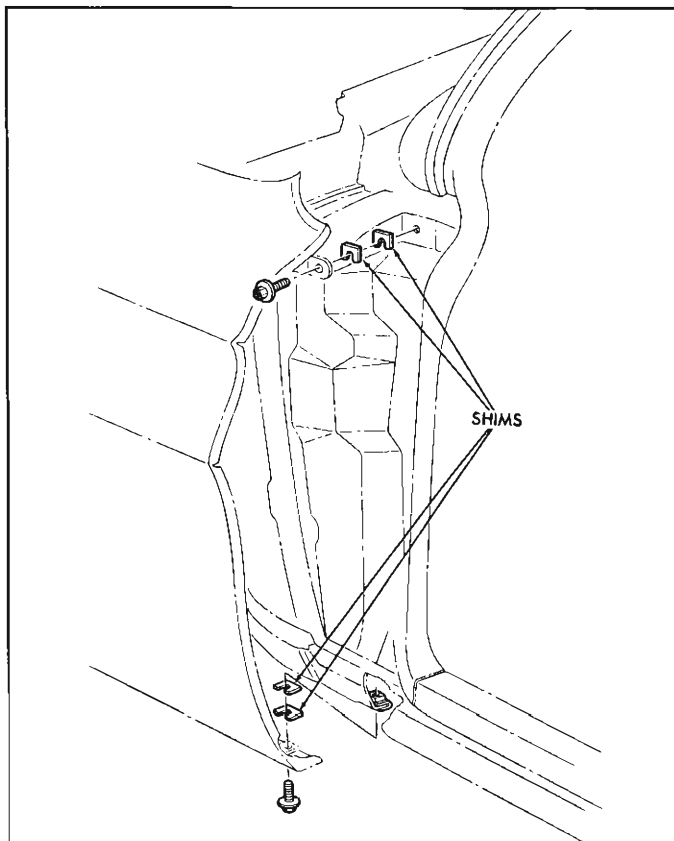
Fender to Cowl and Rocker Panel Shimming
